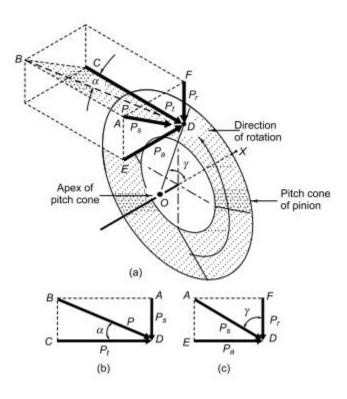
, Components of Tooth Face of Bevel Gear (V B Bhandari, 2006, p. 716)
